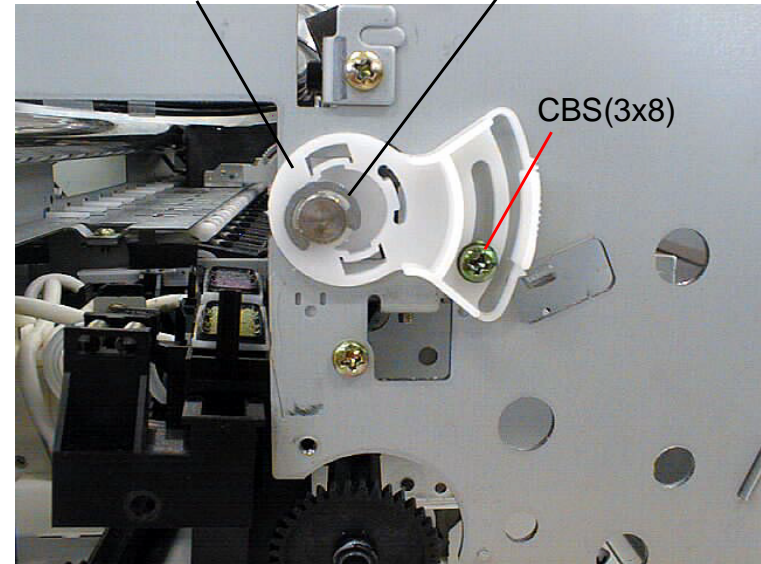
Removal of "Bush, Parallelism, Adjustment" at right side
